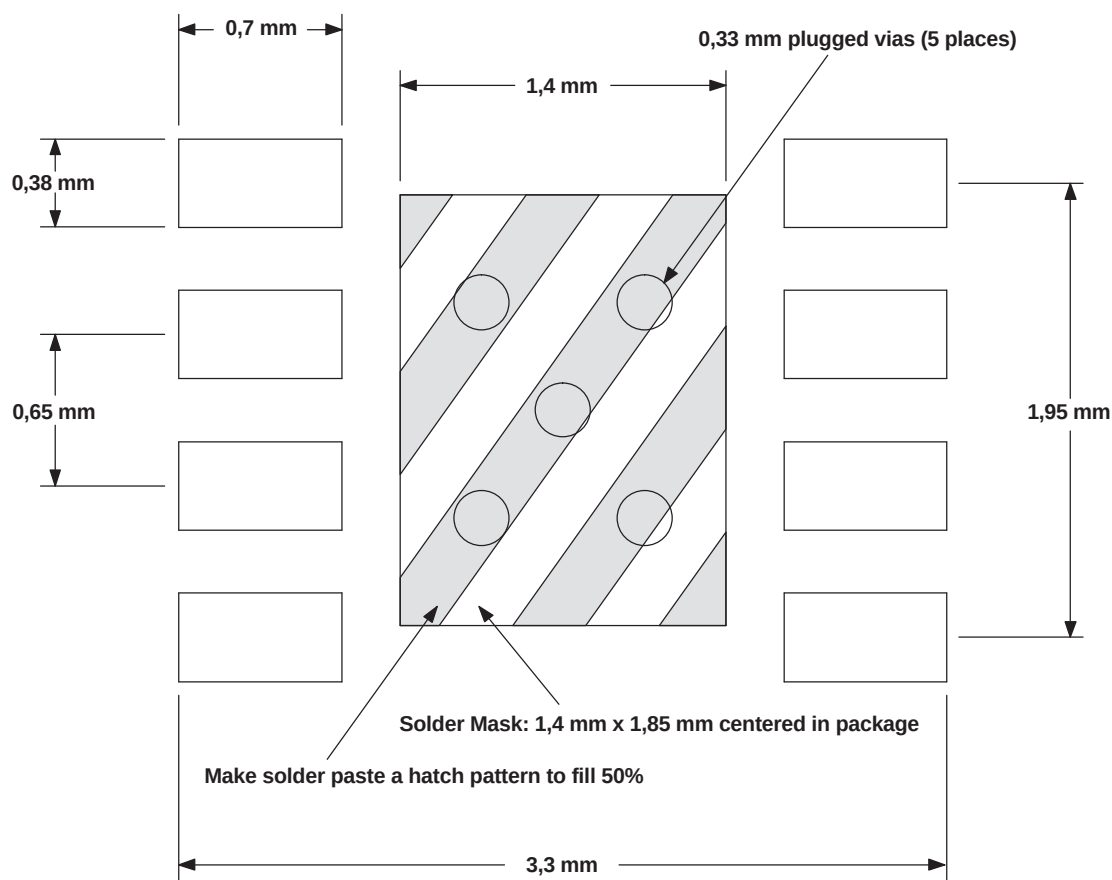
TPA6211A1 8-Pin QFN (DRB) Board Layout (Top View)
